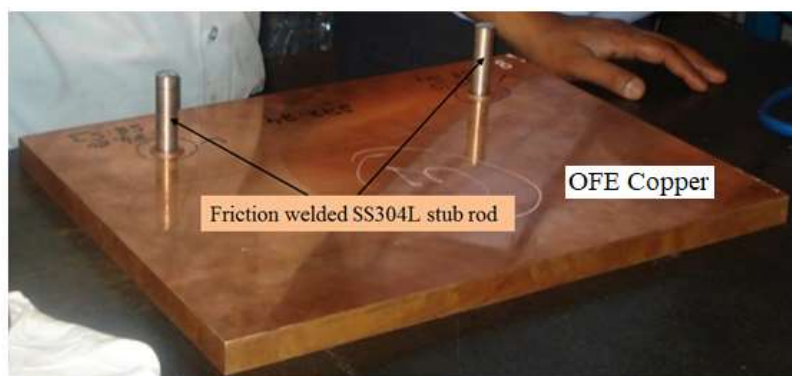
Friction welded SS304L rod with OFE copper plate (IPR will provide it as a FIM)
